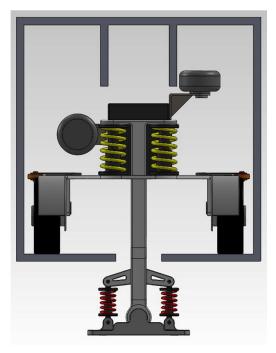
Cross-section view showing interface between guide-way and switching mechanism
